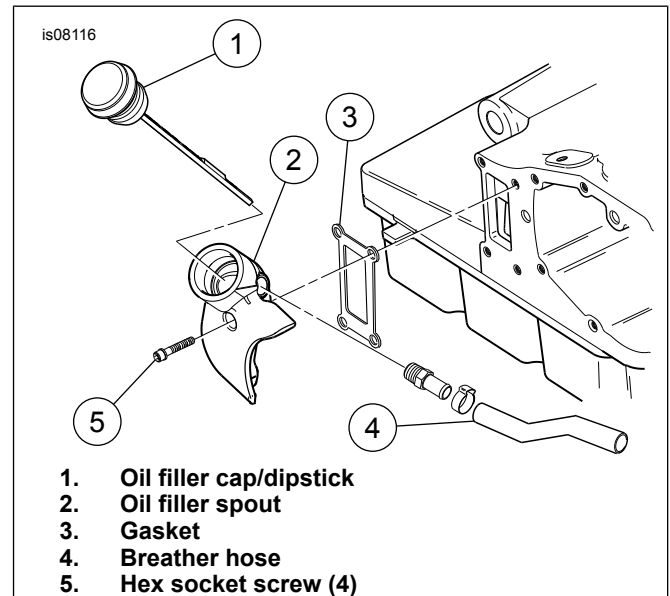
Remove Oil Filler Spout (FLT Models Only)
